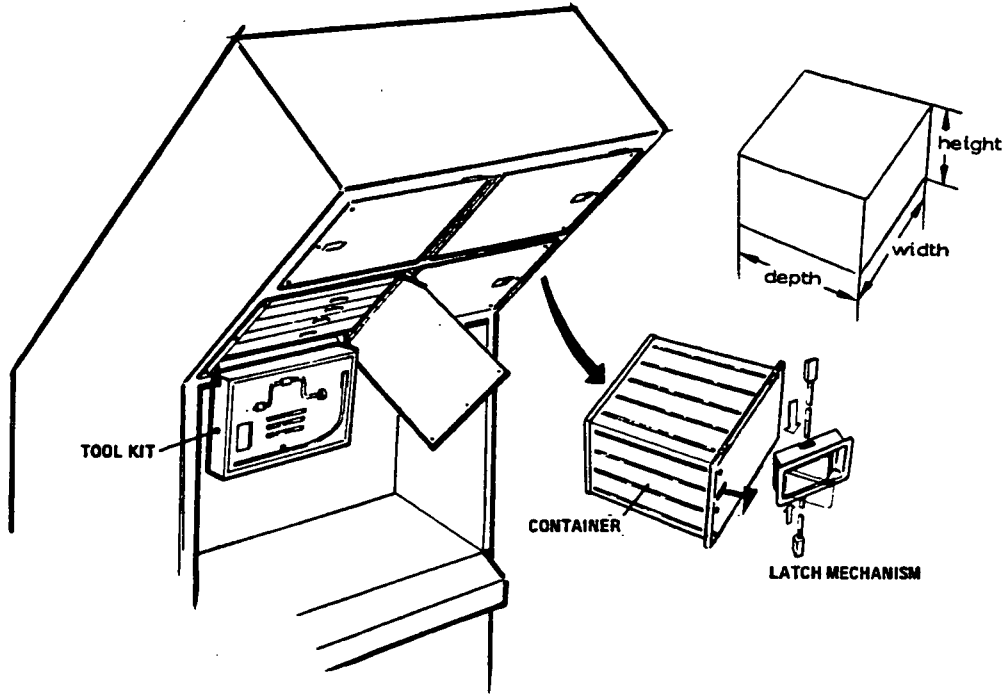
3: Typical Work Bench and Rack Mounted Storage Container
